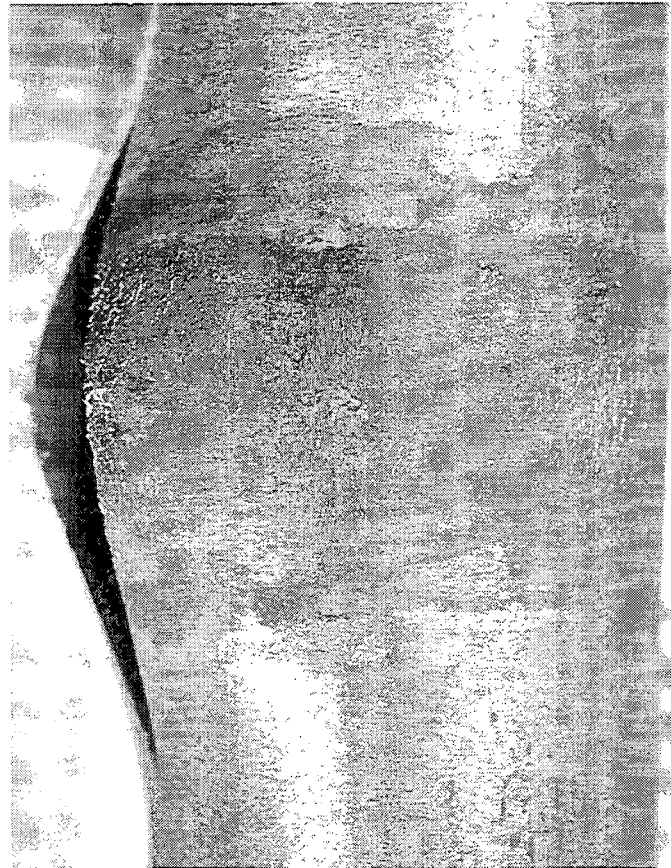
TSP2 crevice region Specimen 6B of Tube R15C28. Appearance of the 70° face after the burst test. Mag. 3X.
